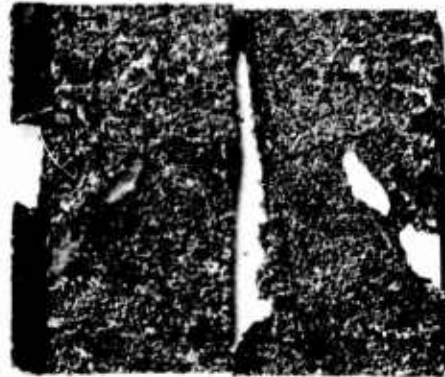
Modification B - Typical Failed Lap Shear Specimens
